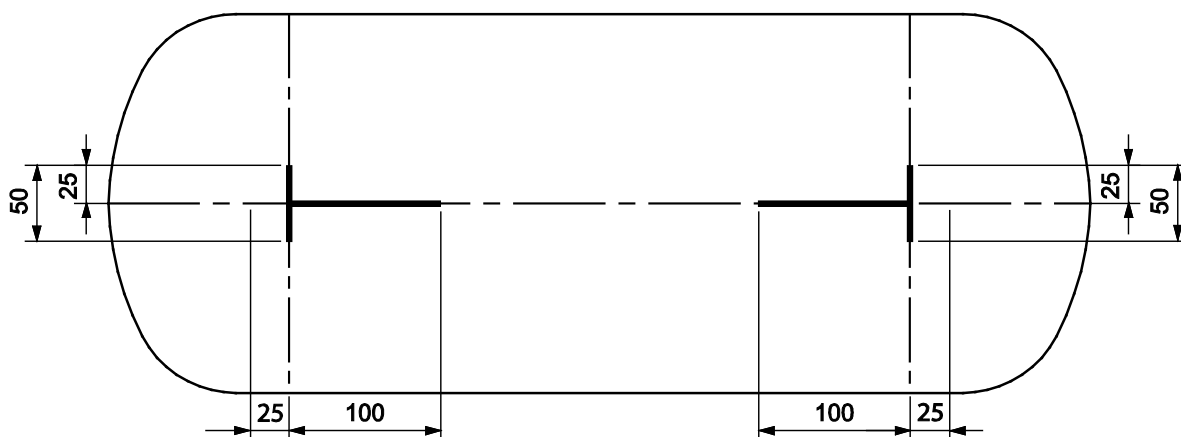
Extent of radiography of welds – Cylinders with circumferential and longitudinal welds
